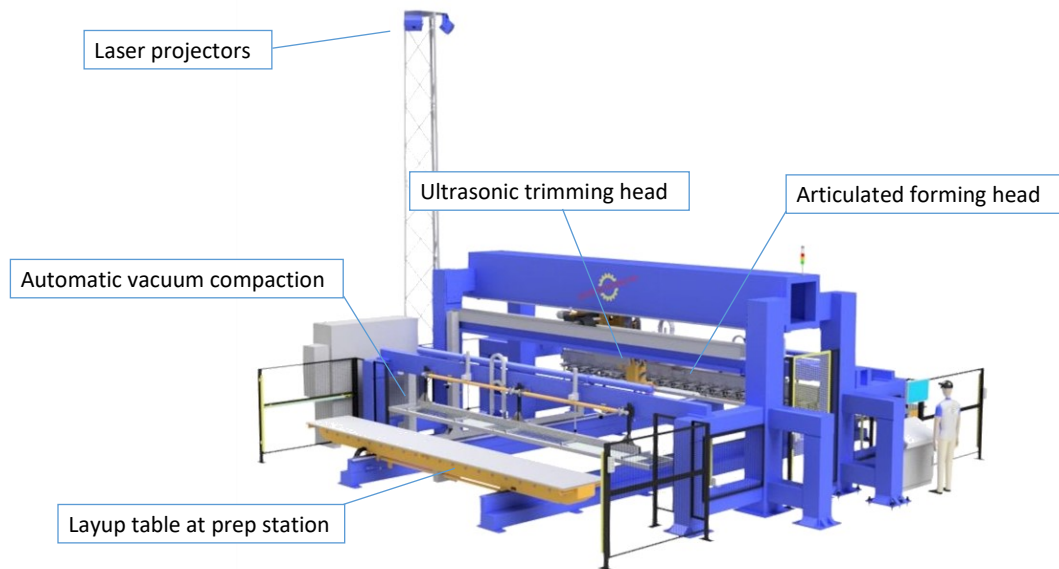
Stringer Former and Trim Cell Laser Projector Tower Configuration
